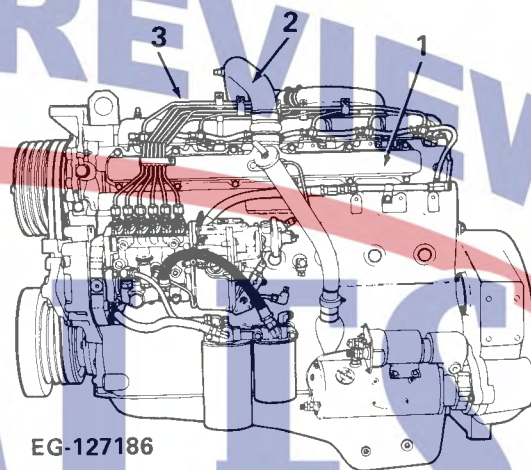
Left Side View DT-466C (w/Robert Bosch Model MW Fuel Injection Pump)
